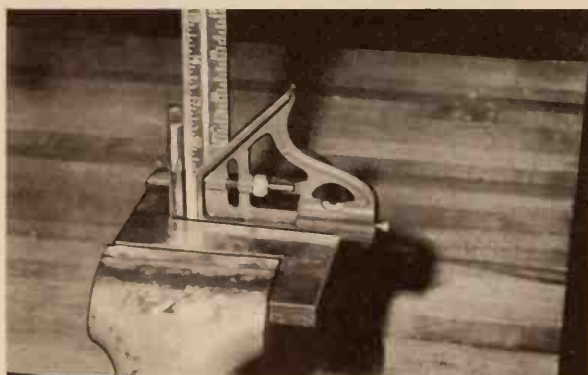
Checking a tap after it is started to make sure it is square with the piece.
